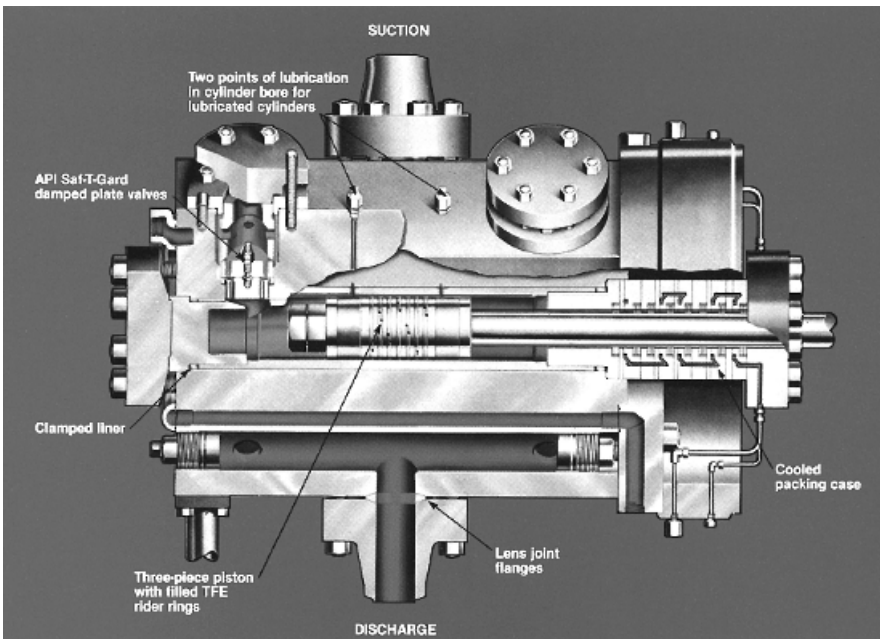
Compressor cylinder with clamped liner, cooling, and lubricating provisions. (Dresser-Rand Company, Painted Post, N.Y.)
